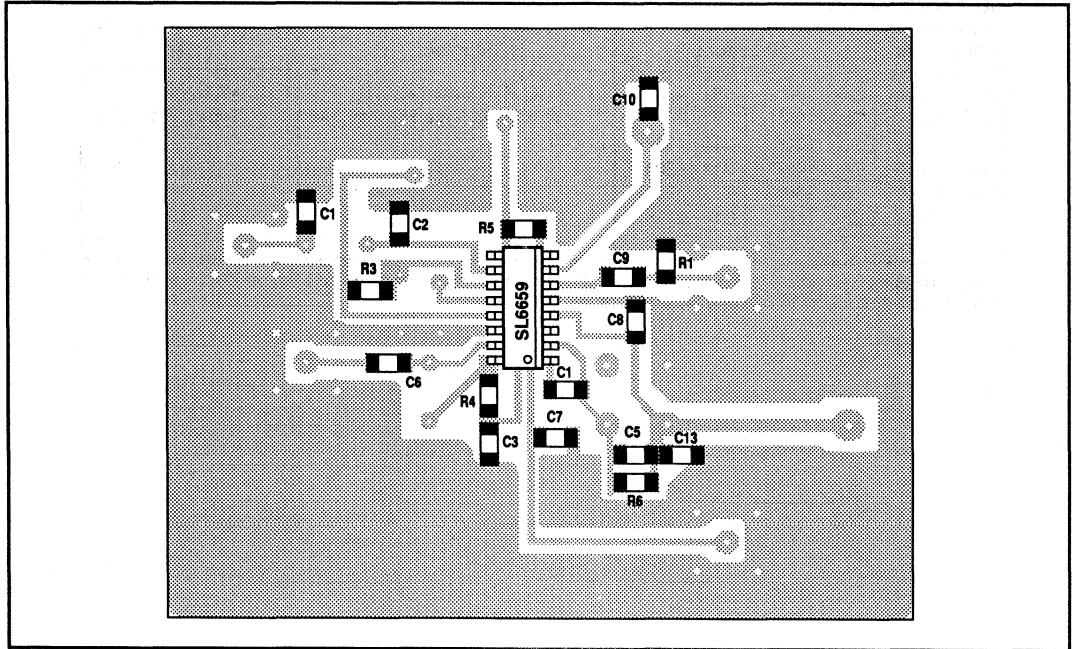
Demonstration board surface mount component overlay (track side). Scale = 2:1.
